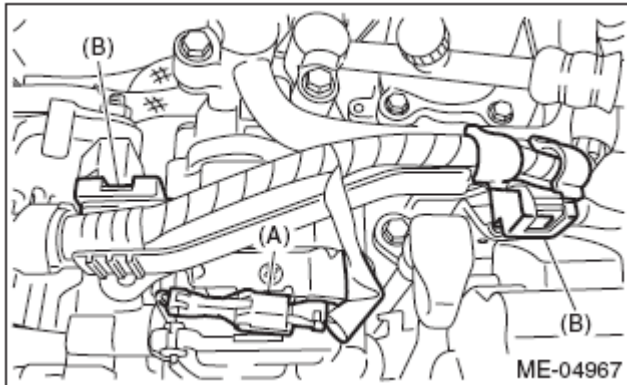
Identifying A/C Compressor Connector And Generator Cord Clip
